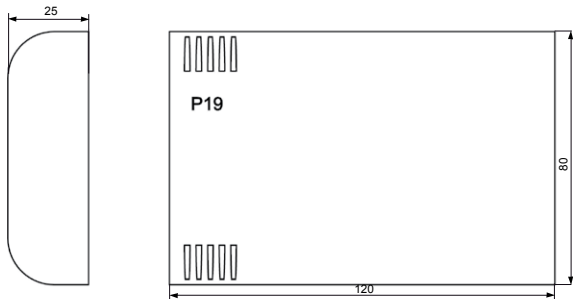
Overall dimensions of the P19 transducer and correct working position
